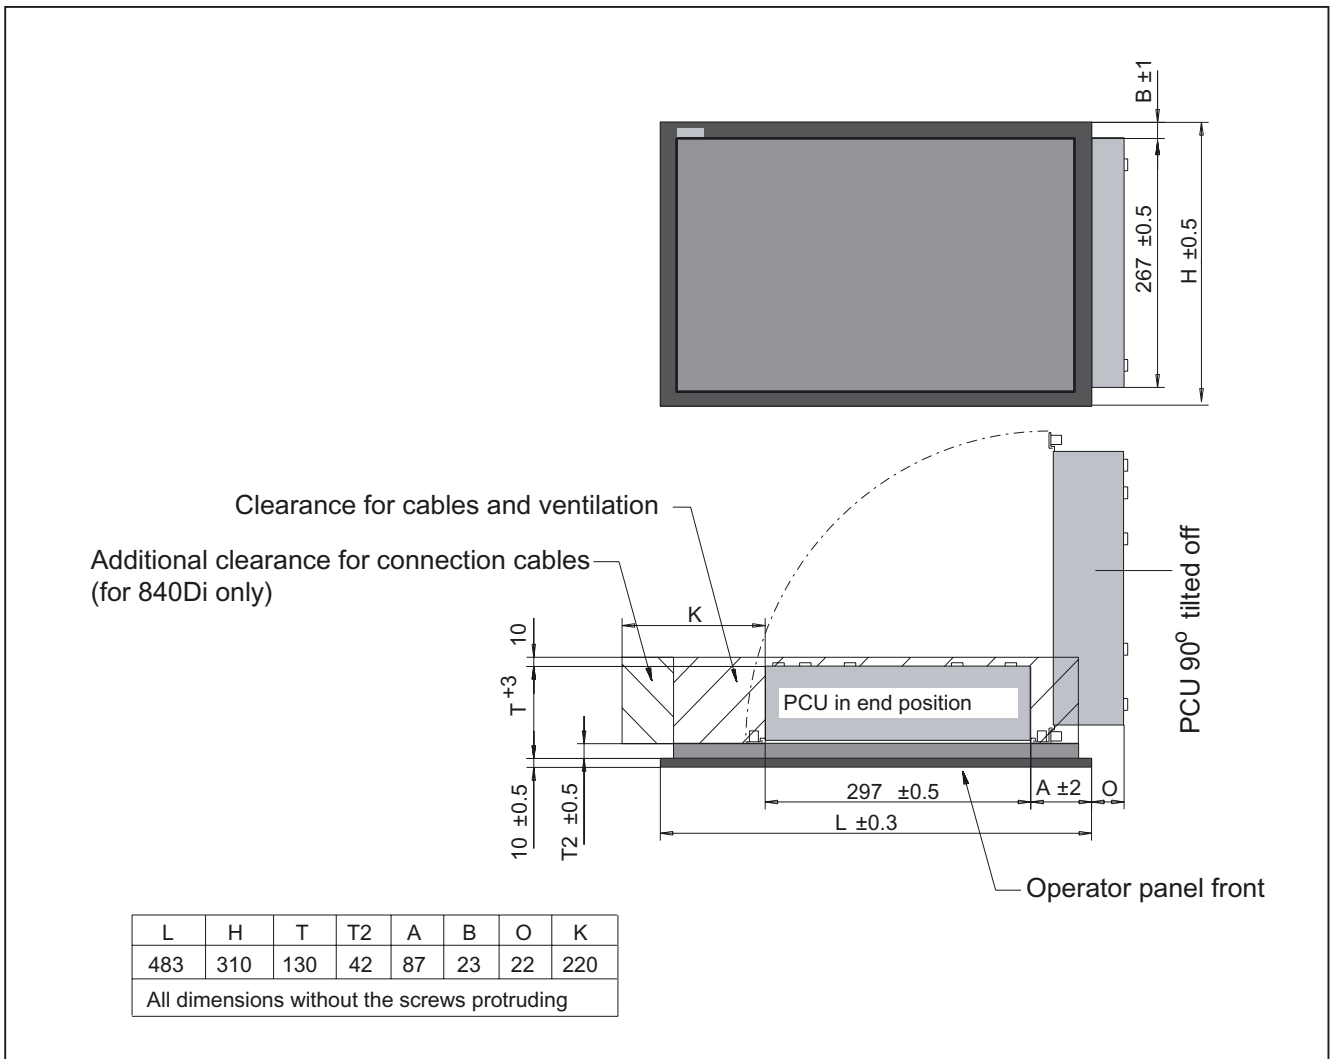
Attaching the PCU to the OP015 operator panel front
